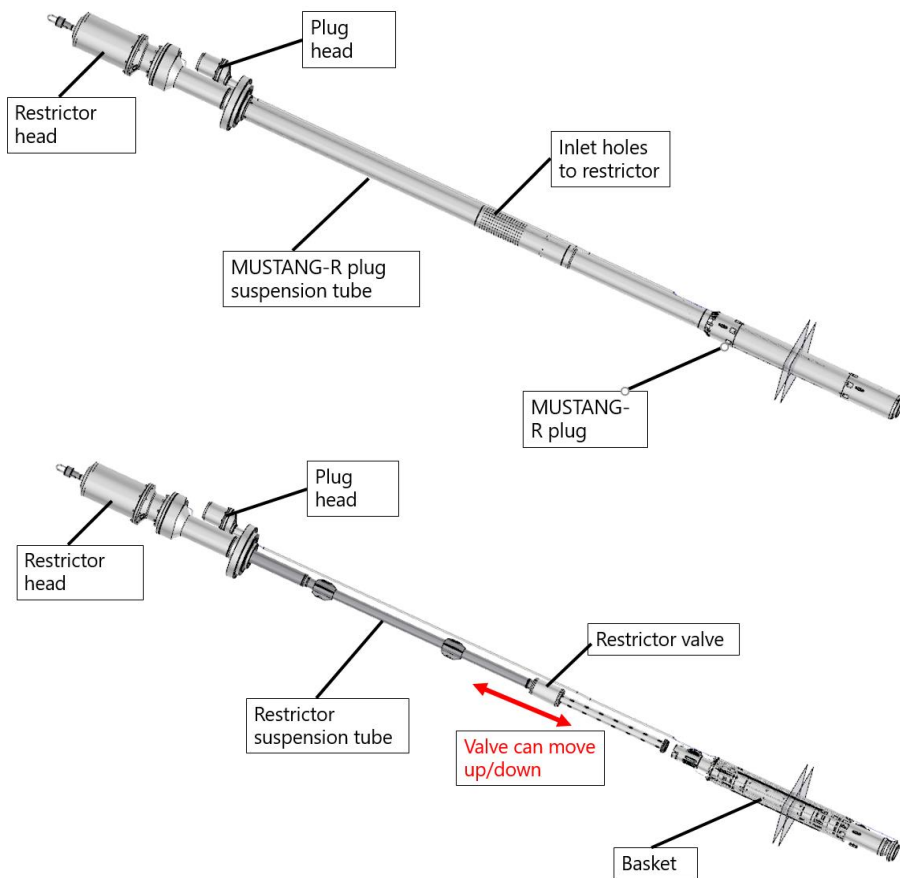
MUSTANG-R plug with inlet holes for the coolant (top) and basket below the restrictor suspension tube (bottom)
